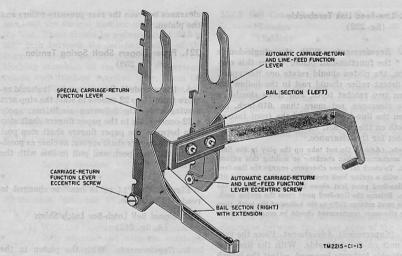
(Added) Automatic carriage-return and line-feed bail assembly.
